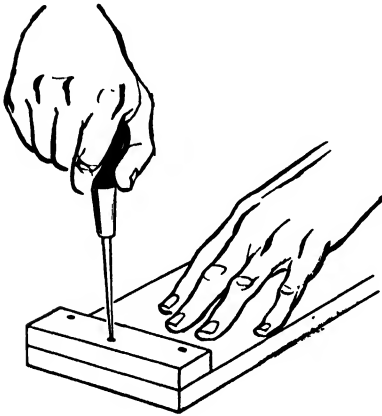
Marking locations of drill holes in the second board by using the top one as a template for guiding the awl.
